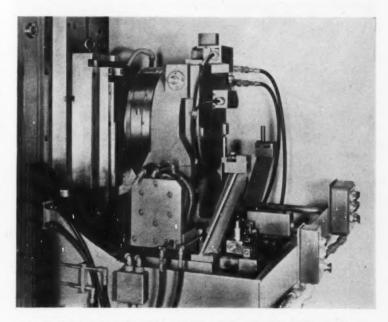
Close-up view of broach and fixture used on 6-ton Colonial single-ram broaching machine to produce "blind" slots in tank brake-applying cam rings
